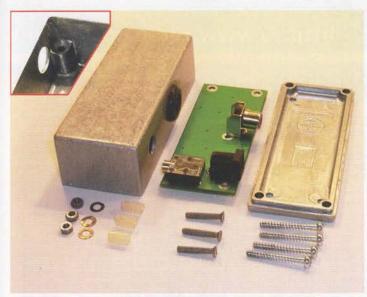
Case, circuit board and mountings (plus, inset) modifications to the box lid mounting pillars to clear the PCB.
